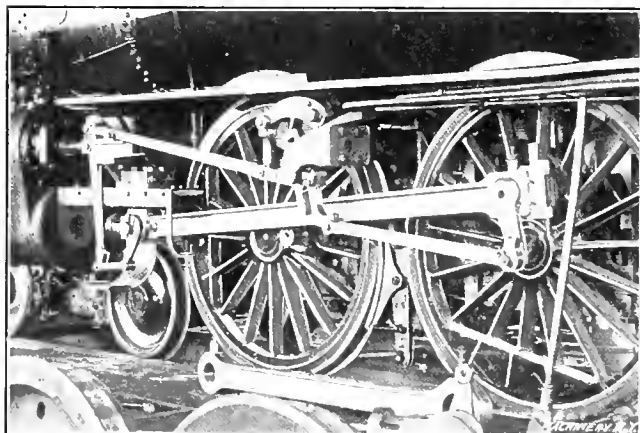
Design of Walschaerts Valve Gear used on Atlantic Type Engines
